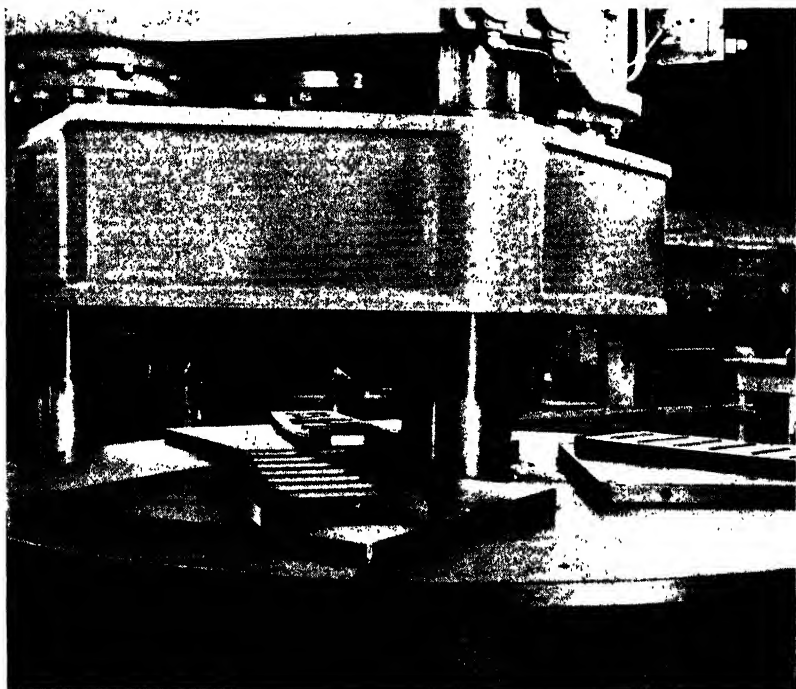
Dieing Machine Equipped for Producing Hand-guard Ferrules at an Average Rate of 21,000 Pieces per Eight-hour Day
